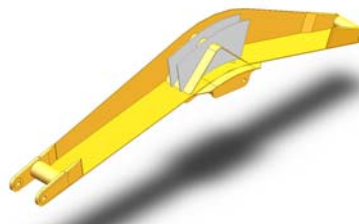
ISO view of boom model with suggested enforcing plates - top of the boom and right side removed for clarity
